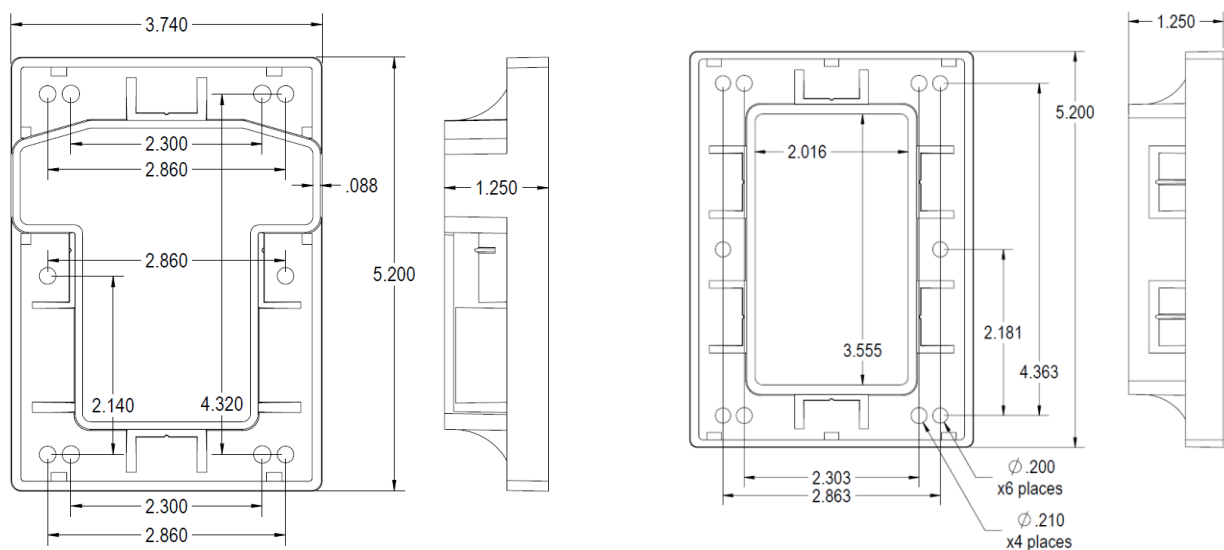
Sonic Beveled-S,R,T and Sonic 24-S,R,T Top and Bottom Rail Mounting Brackets
